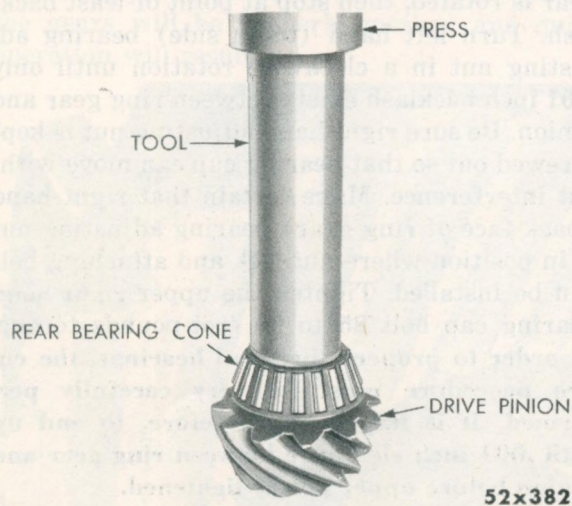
Installing Pinion Bearing Cone on Pinion Shaft
